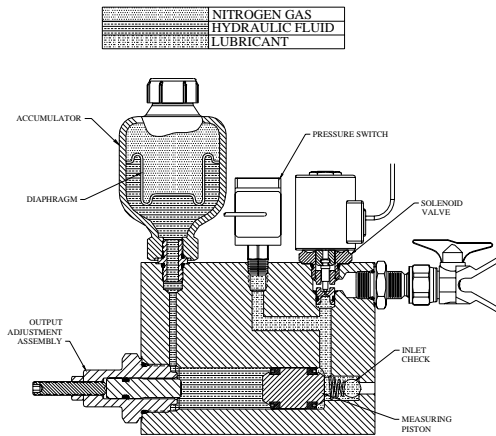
STAGE 1. Airless Spray Valve ready for charging with lubricant.
